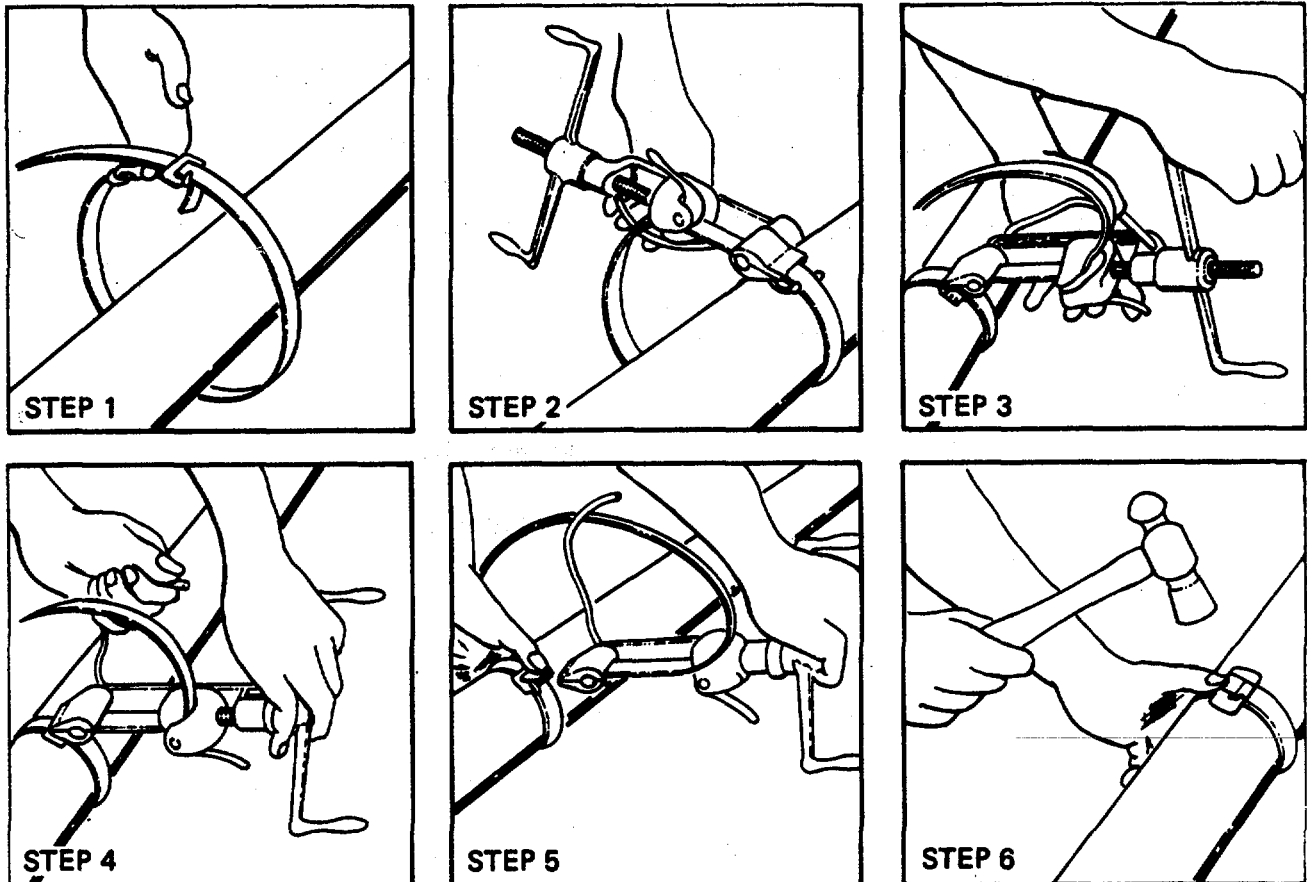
Clamp Installation Using Clamping Tool (Appendix C, Item 38).
